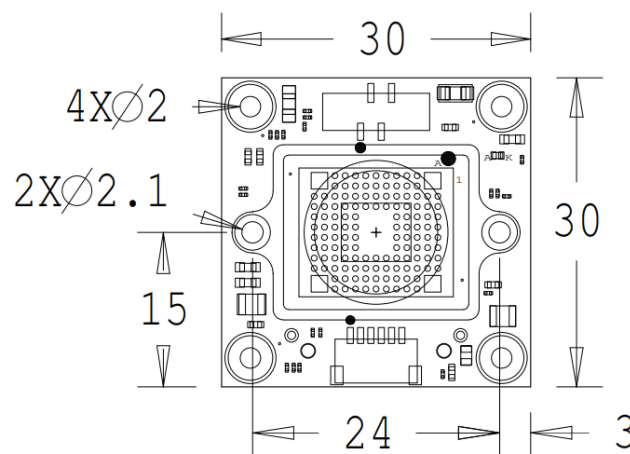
Top View of e-CAM521_CUMI568C_MOD_H01R1 Mechanical Drawing
